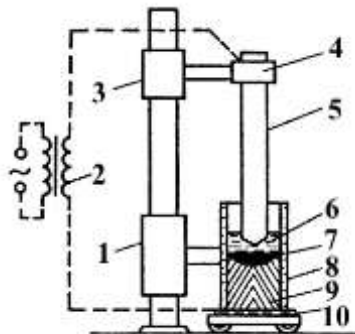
Electroslag remelting: 1 – mould lifting carriage; 2 – transformer; 3 – electrode replacing mechanism; 4 – holder; 5 – consumable electrode; 6 – liquid slag; 7 – liquid metal; 8 – mould; 9 – ingot; 10 – bottom
